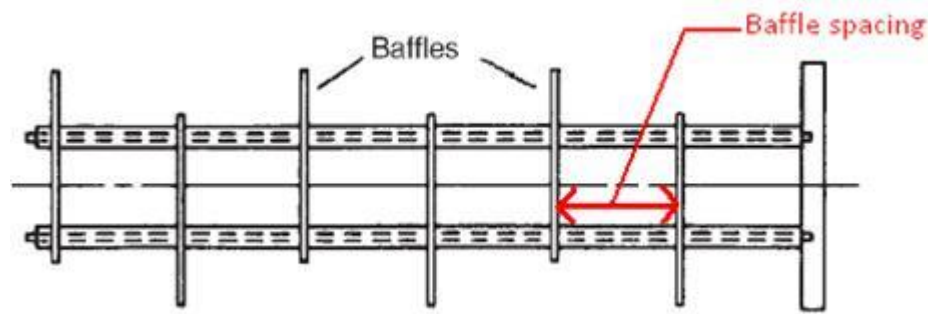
Baffle alignment and spacing in a heat exchanger [26].
